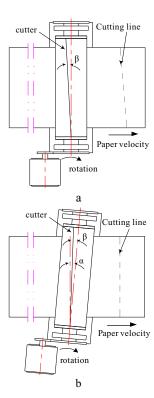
Position relationship of roller and paper;(a) roller axis is perpendicular to paper velocity; (b) roller axis isn't perpendicular to paper velocity.
